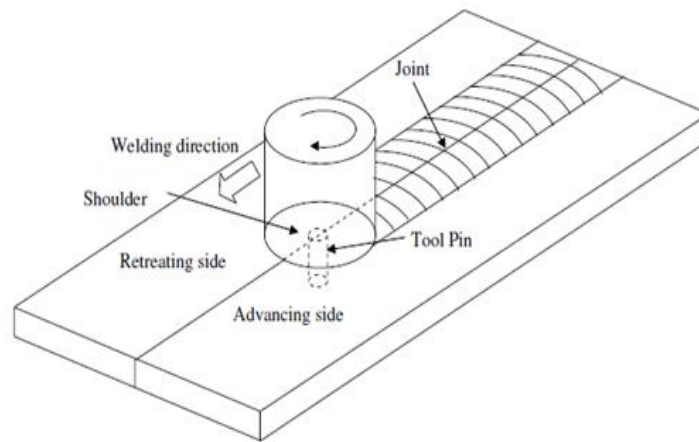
Schematic drawing of Friction stir welding process.
